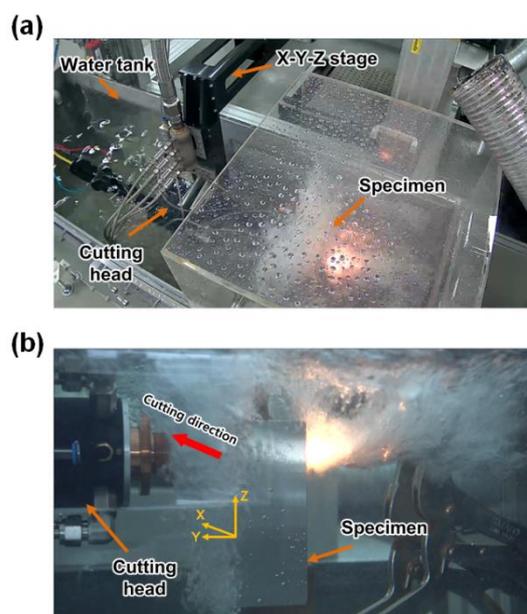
Views of the underwater laser cutting experiment: (a) whole view, (b) partial side view.
